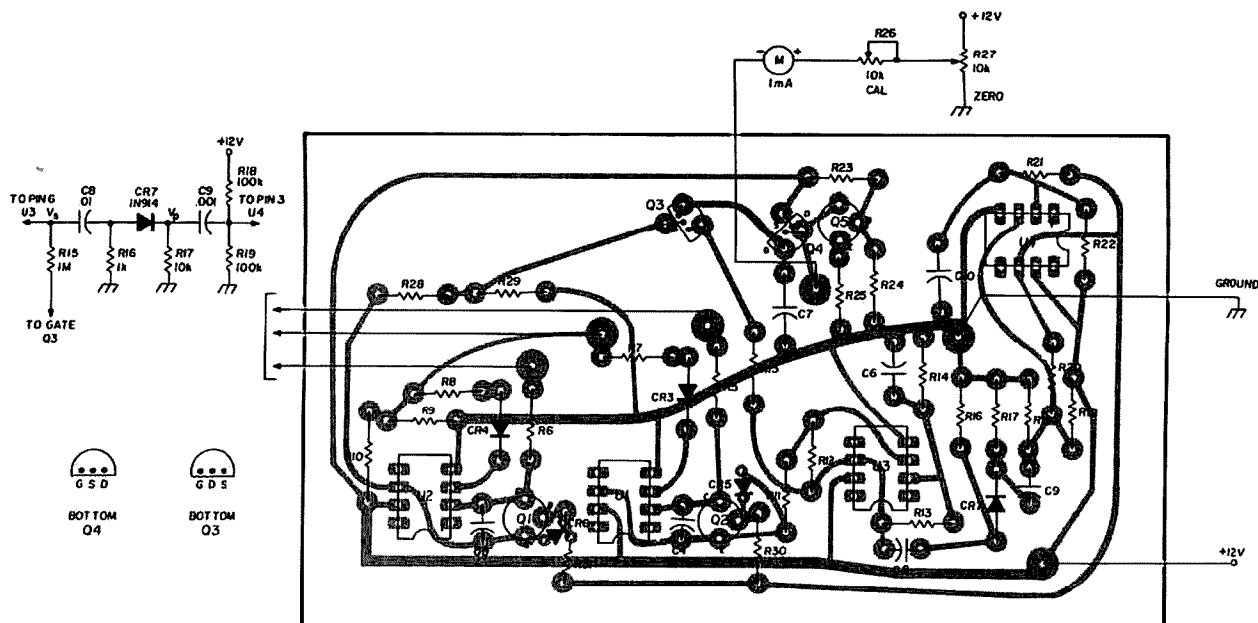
Parts placement and corrected board layout for the simple computing vswr indicator by WB9CYY.
